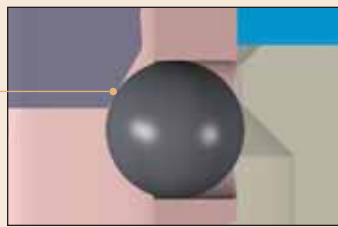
Close-up of locking ball position with Tool Changer in Ready-to-Lock position
